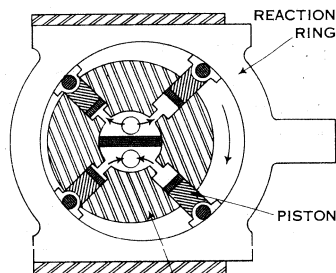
HYDRAULIC RADIAL-PISTON PUMP OR MOTOR
